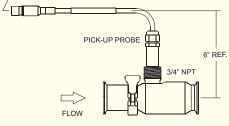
SIDE VIEW with PROBE ASSEMBLY
